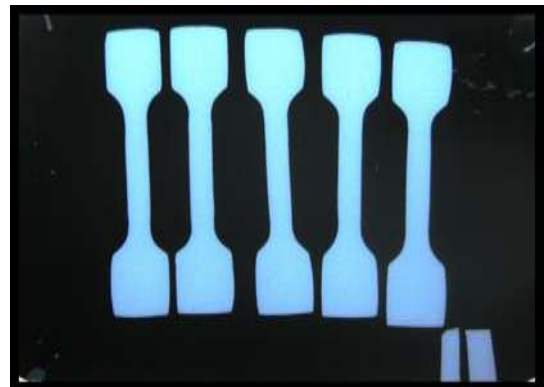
Radiographic inspection of Co-Cr samples for defects
